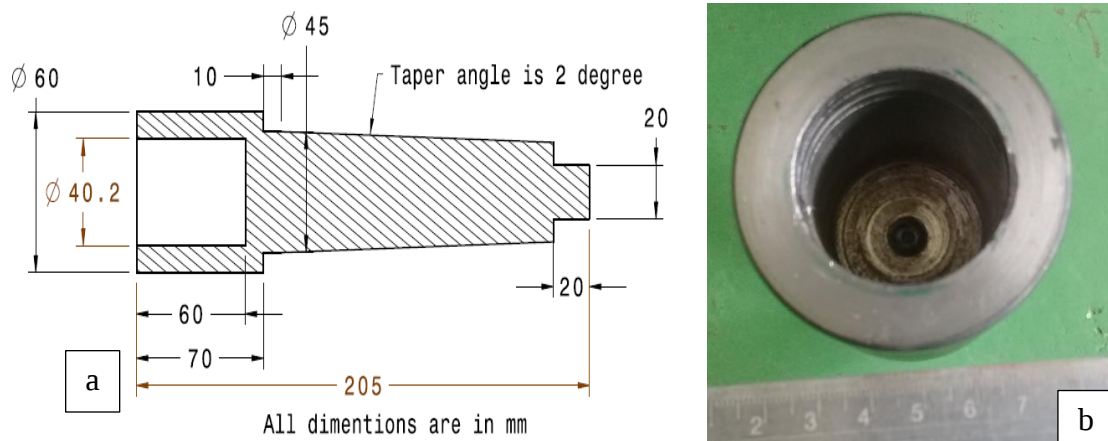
a) Detailed schematic of the chamber, b) The manufactured Chamber
